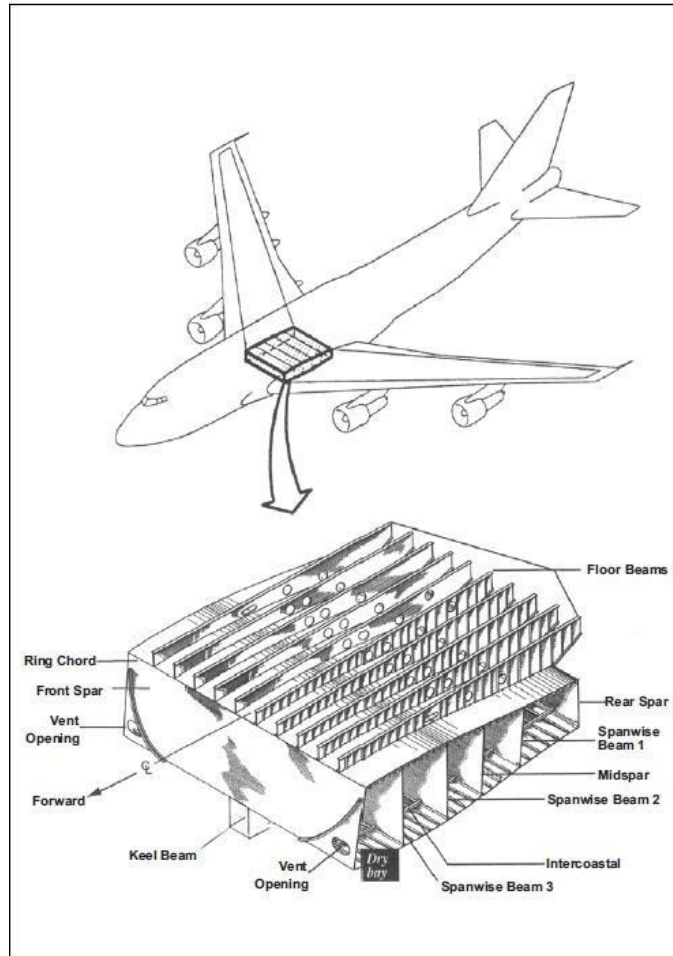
Cross-section of the Boeing 747-100 Wing center section
